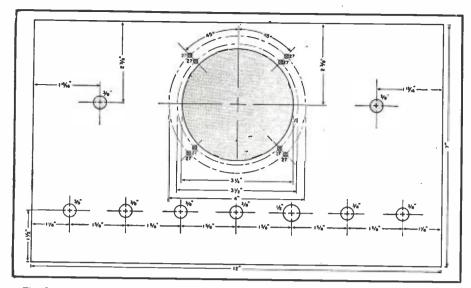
Front panel showing proper layout for mounting speaker and operating controls.
